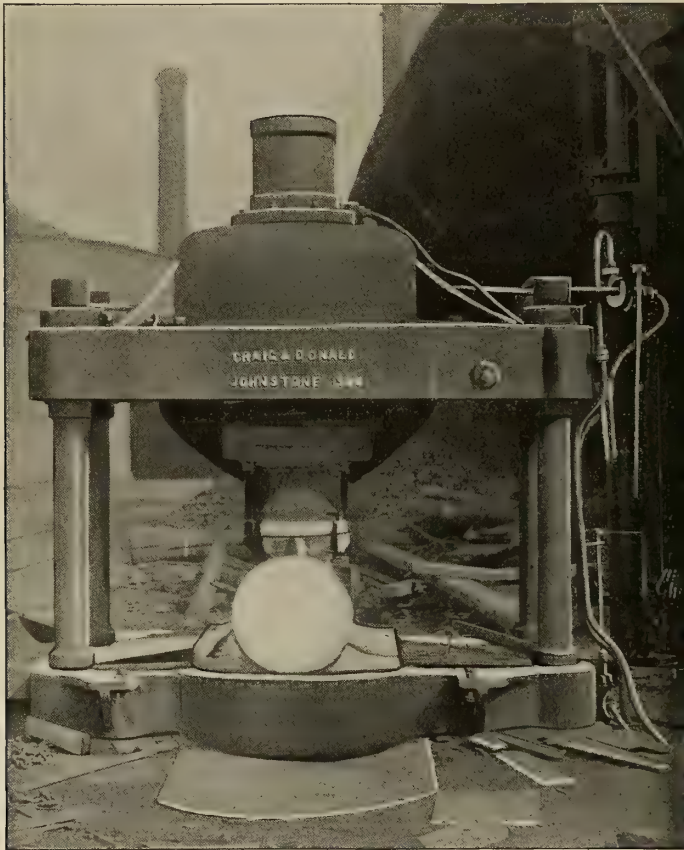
A HYDRAULIC MANHOLE PUNCHING MACHINE.
